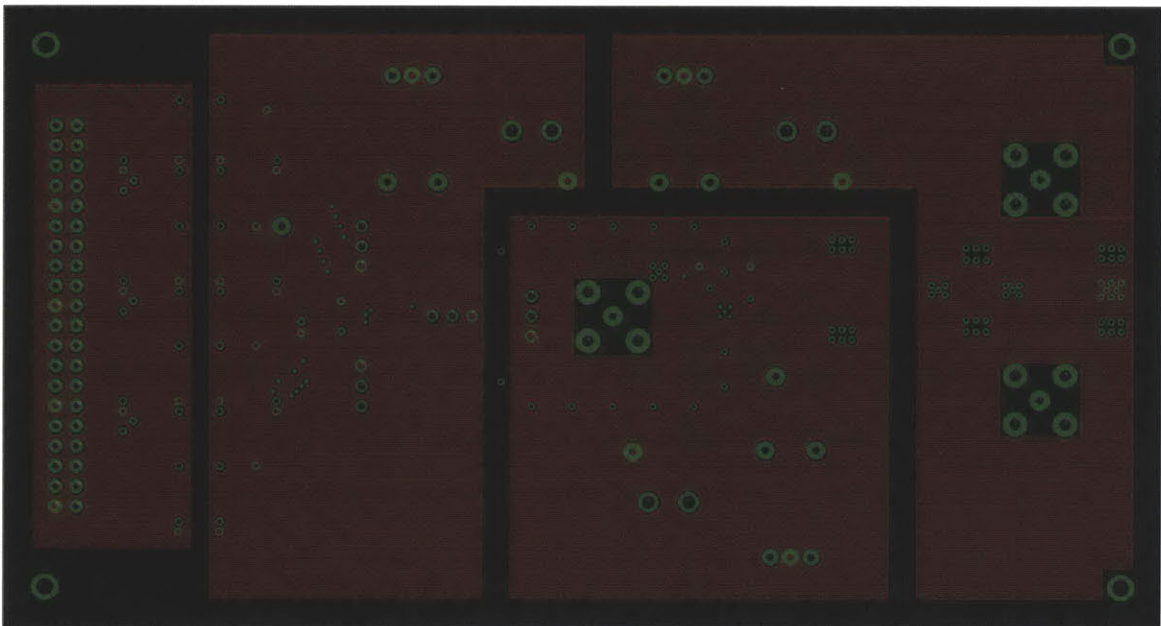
Outphaser PCB VDD layer copper (3rd layer from the top)
